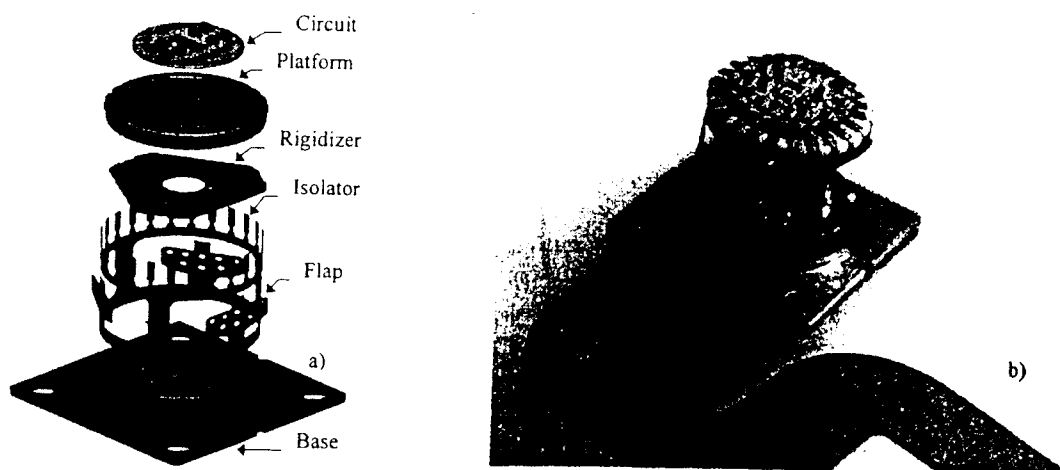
In a) an exploded view shows the detector circuit, platform, rigidizer for increased mechanical stability, isolator, and base. Figure 2b shows an detector circuit bonded to an isolator assembly. The multi-layer flex cable on the bottom must make a turn around the mounting post.
